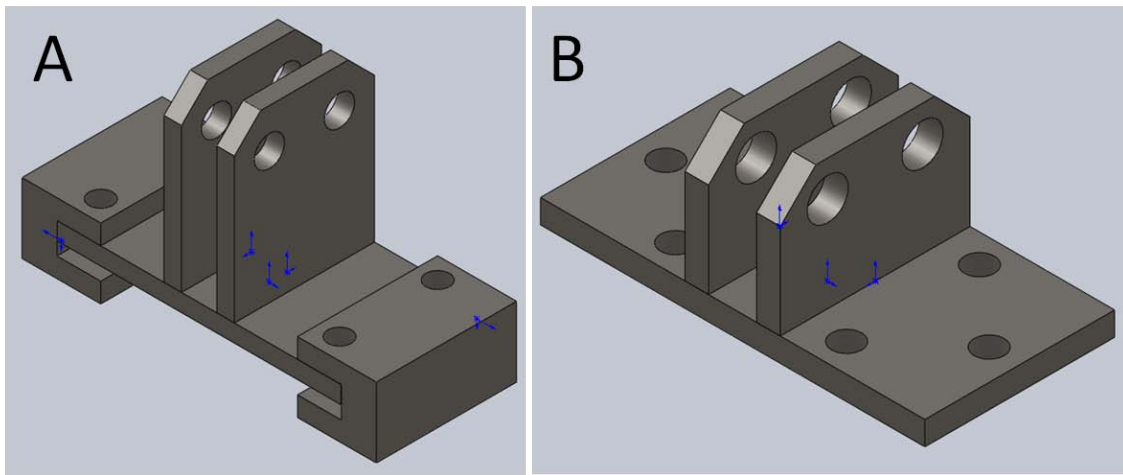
Solidworks model of the shock tube support risers which connect the tube pieces to the support beam. A) a riser which clamps to the beam. B) a riser which bolts to the beam.
